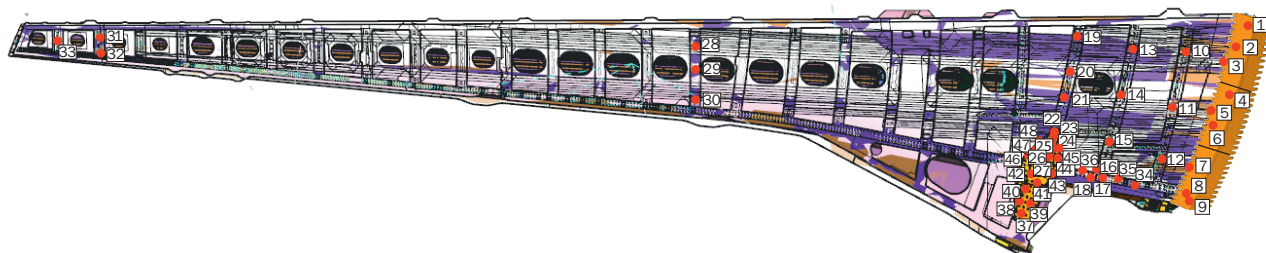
Schematic diagram of the hole machining map for the test wing box
